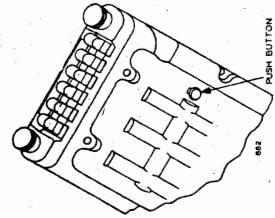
A—Bottom View of Remote Tuner Unit Showing Push Button Release Pin.
